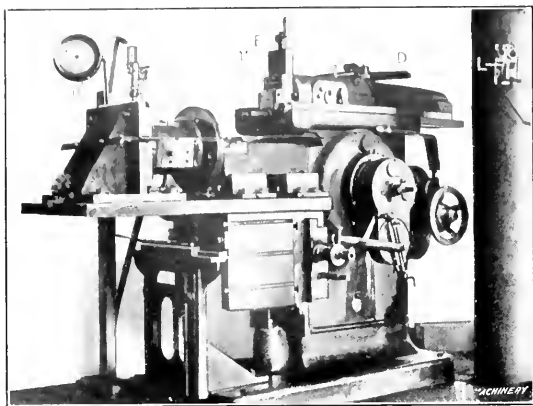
Stockbridge Shaper equipped for conducting an Efficiency Test
